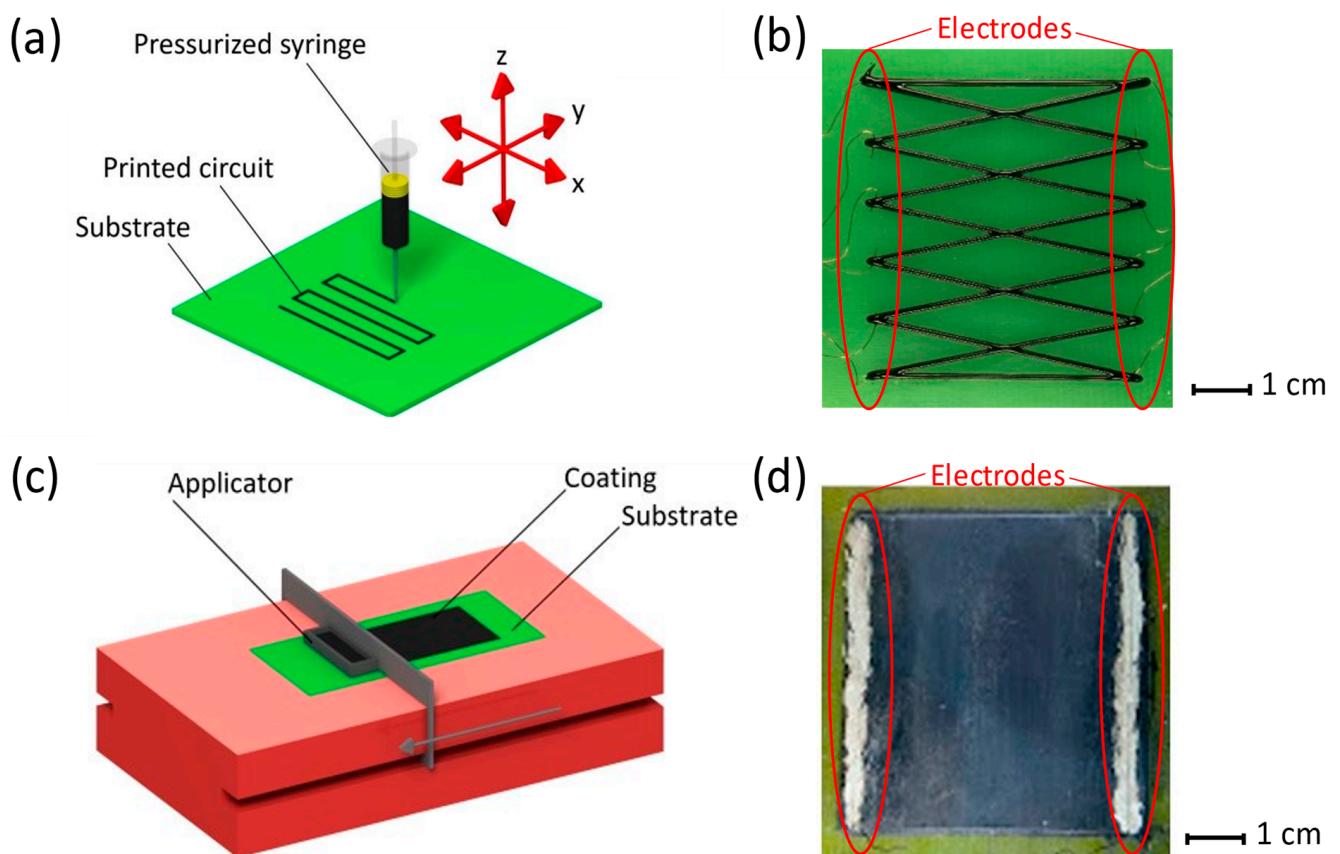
Schemes of the manufacturing techniques and examples of specimens: (a) Direct Write 3D printing scheme, (b) an example of a 3D-printed circuit specimen, (c) coater scheme, and (d) an example of a coating specimen.
